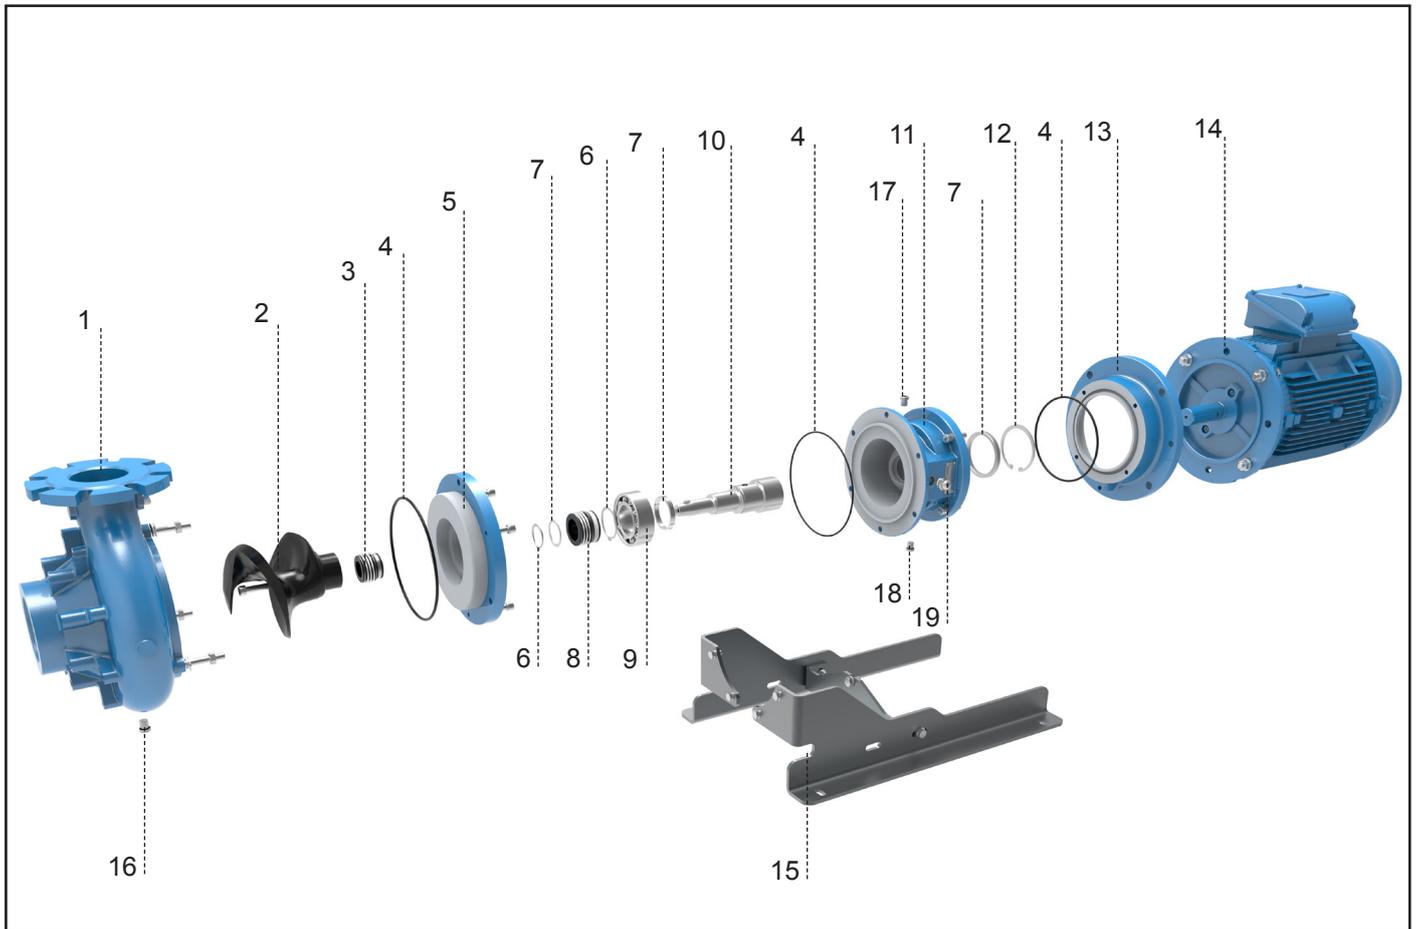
Verderhus® Exploded View - Closed - Coupled Pump (generic view)
